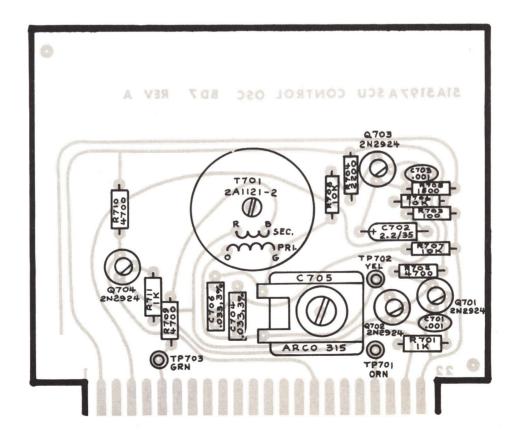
SCU Control Oscillator (Board 7), Parts Location
